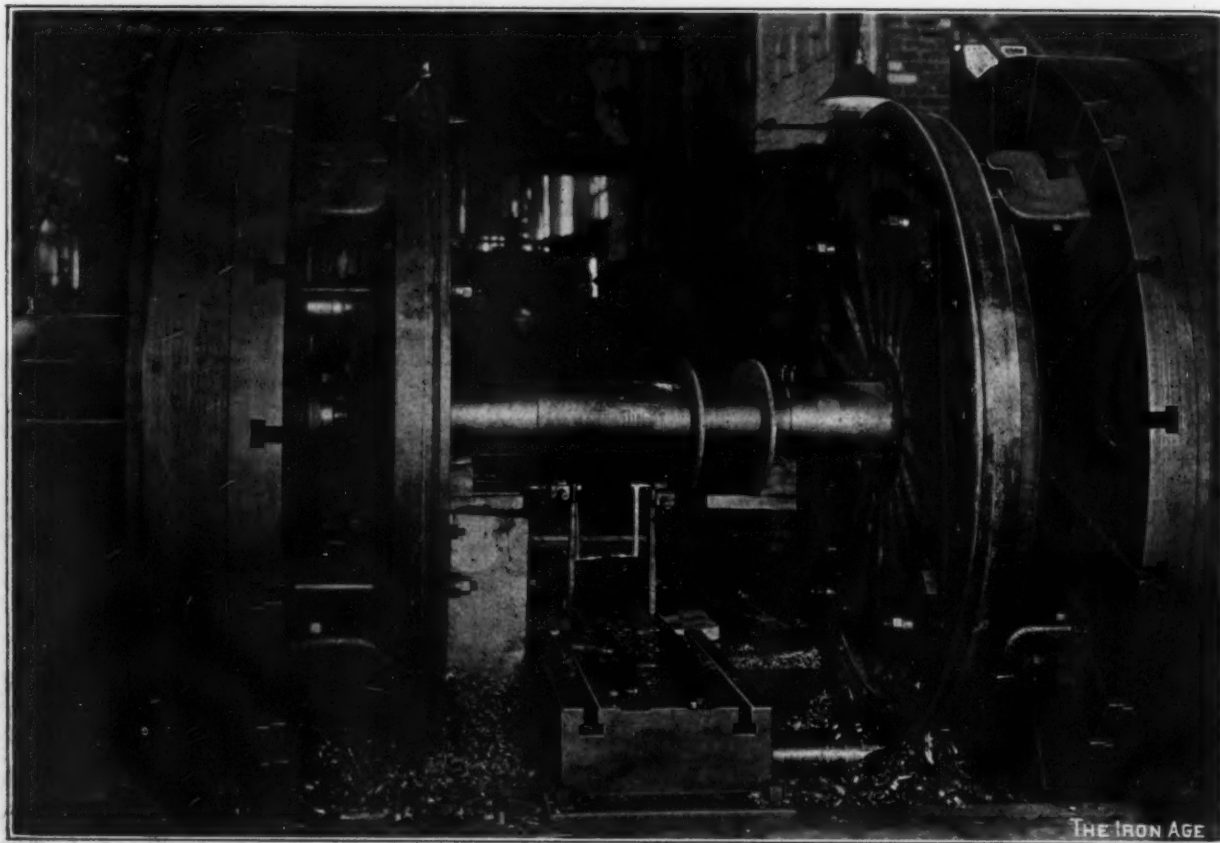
A Nearer View of the Lathe from the Rear, Showing the Wheel Chucking Devices.
